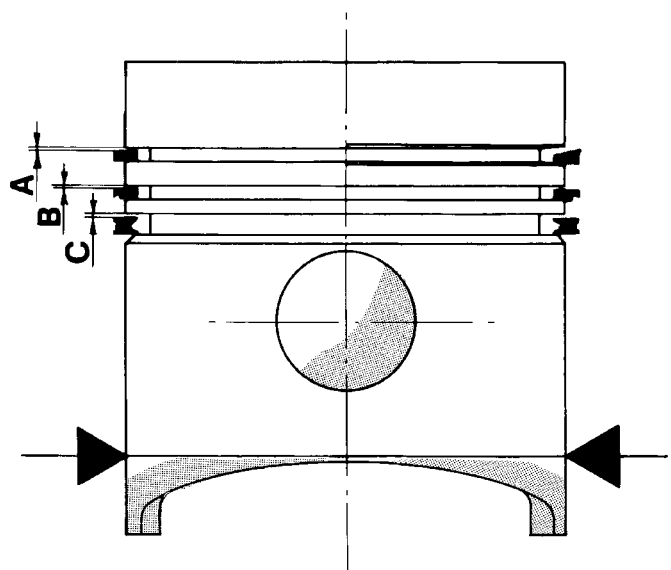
PISTON RING TO GROOVE CLEARANCE
